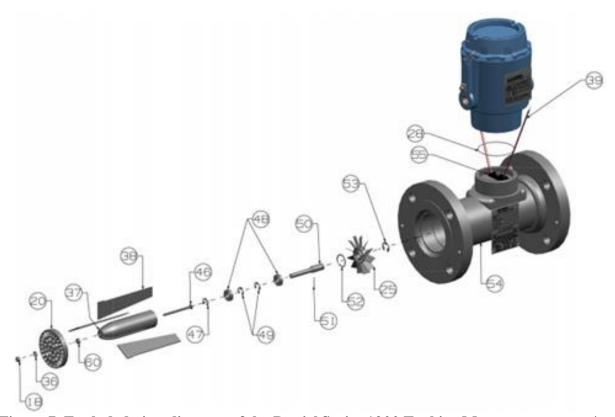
Exploded view diagram of the Daniel Series 1200 Turbine Meter components | Diagramme de vue éclatée des composants du compteur à turbine Daniel de la série 1200
